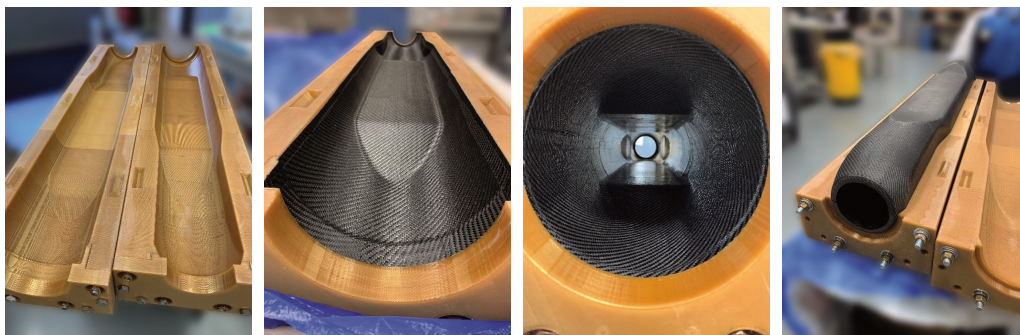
An fused deposition modeling additively manufactured layup mold for composite fabrication using ULTEM 1010. This two-part clamshell mold was used to manufacture a composite fuselage for a drone aircraft prototype. Each mold half had carbon prepreg material applied to it, and when the molds were stacked, the material was joined on the inside to make the continuous barrel.
